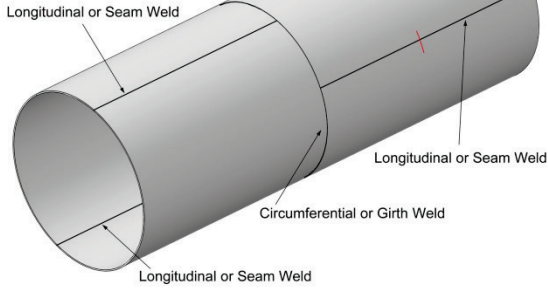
CASE 4: CIRCUMFERENTIAL CRACK PERPENDICULAR TO AN AXIAL WELD - RESIDUAL STRESS PARALLEL TO THE AXIAL WELD WITH A DOUBLE-V NOTCH
